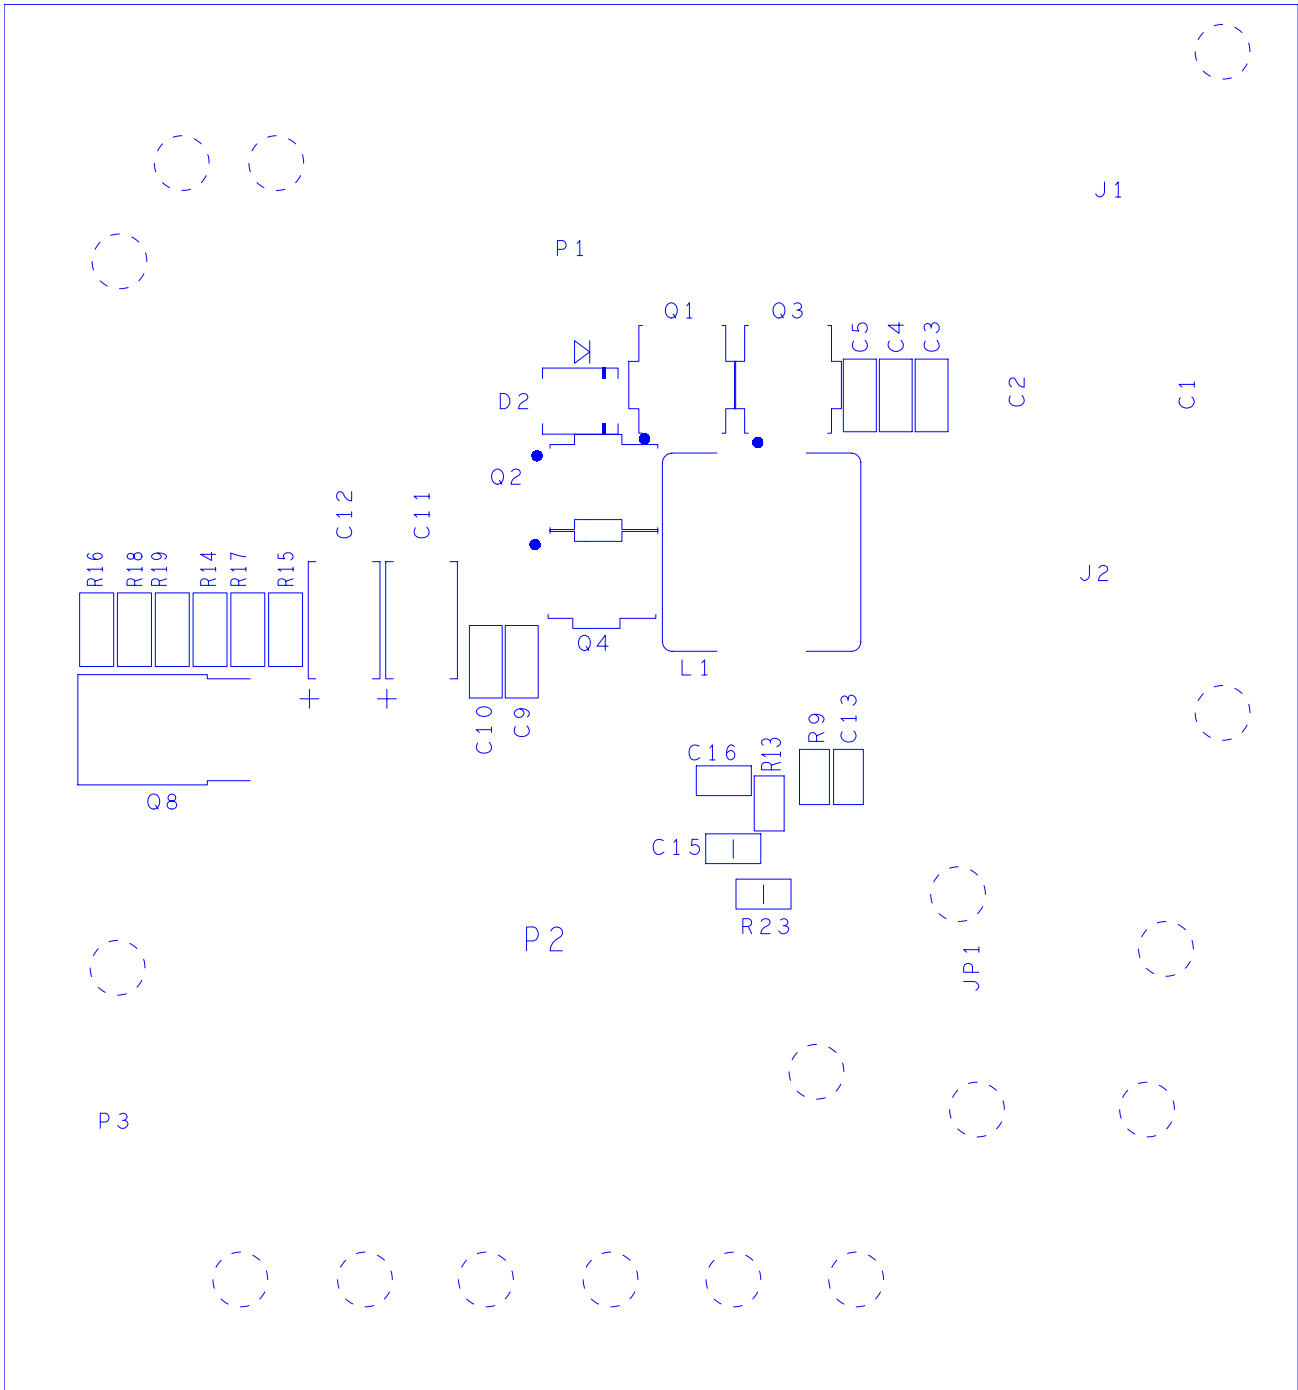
PCB BOTTOM SILK SCREEN (MIRRORED)
